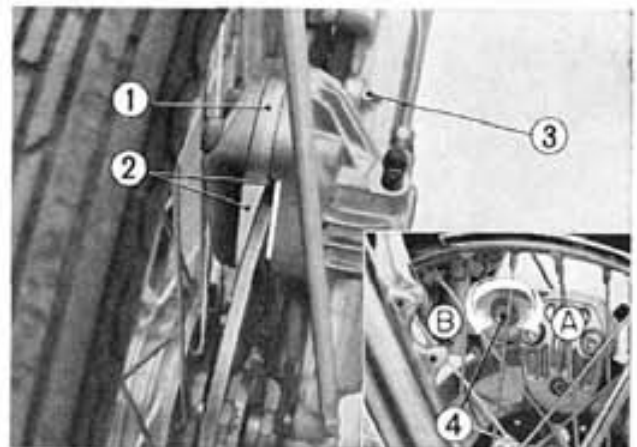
① Brake caliper ② Friction pads ③ Stopper colt lock nut ④ Stopper bolt
